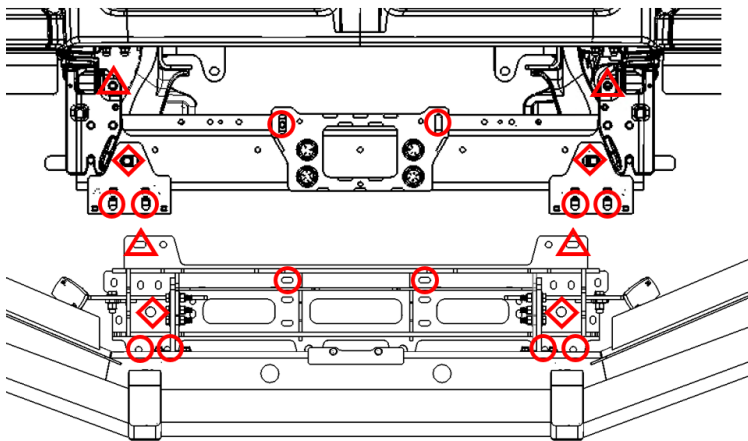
Main Bracket Mounting – Truck with 6 Front Bumper Fasteners
